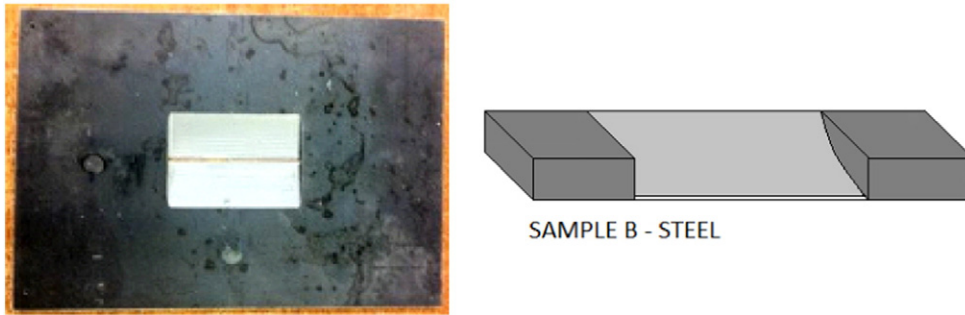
Photograph and longitudinal cross-section of sample B – steel.
